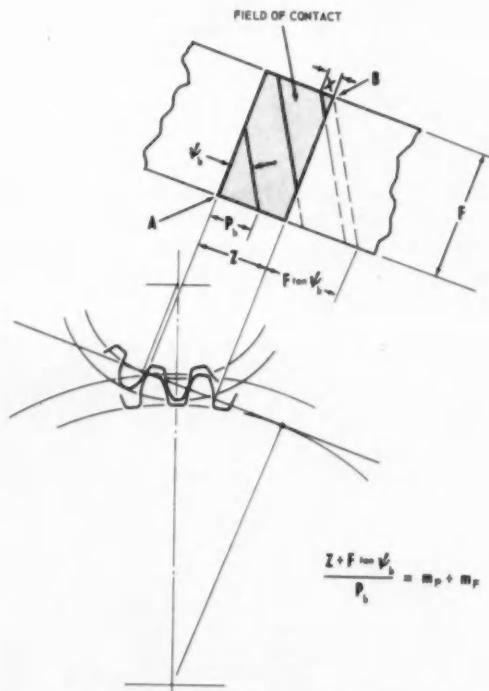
Helical gear tooth action — note that x is the distance that tooth element A travels before the next abrupt change in tooth load occurs (that is, when B leaves engagement).
